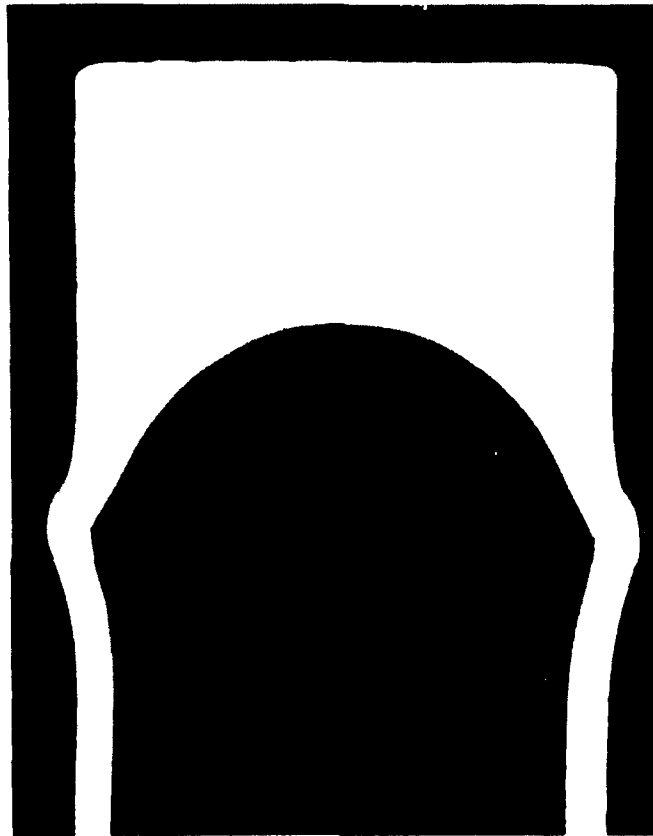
Section View of Penetrator With Deep Control Groove in Primary Failure Zone (P 46D) After Impact on Concrete Target at 2130 ft/s.
